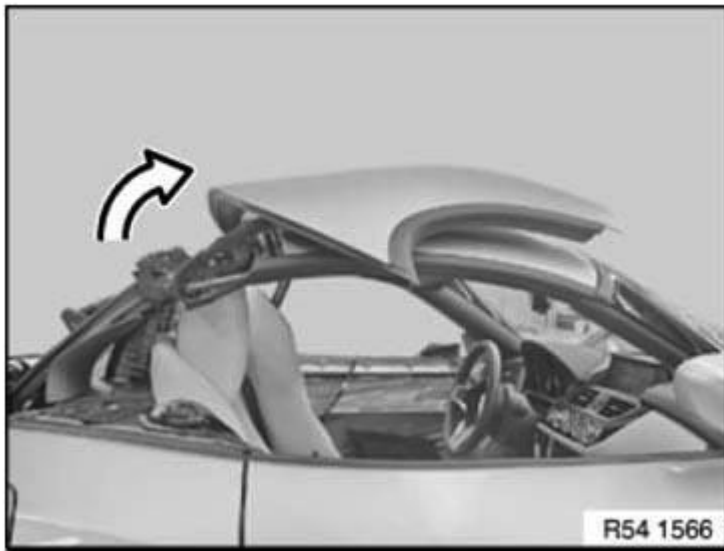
Lifting Rear Roof Shell With Assistant On Front Roof Shell
